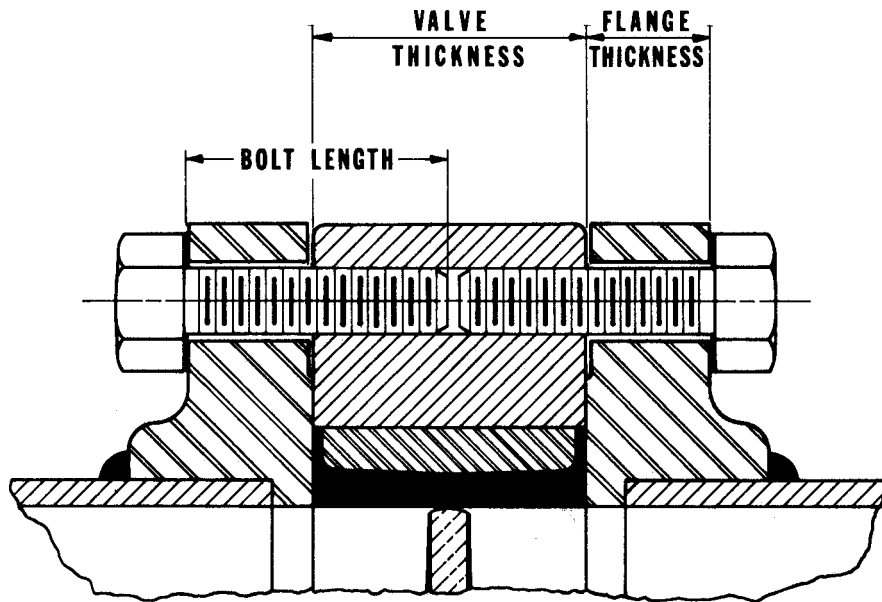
Tapped Lug-Type Butterfly Valve Bolt Assembly with 150-psi Steel or Bronze Flanges
